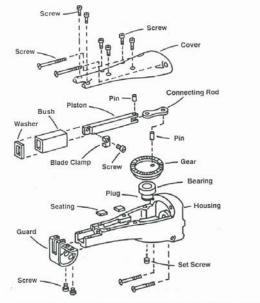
Power saw (new design-29 parts, 2.58 min assembly time). (After Ref.
